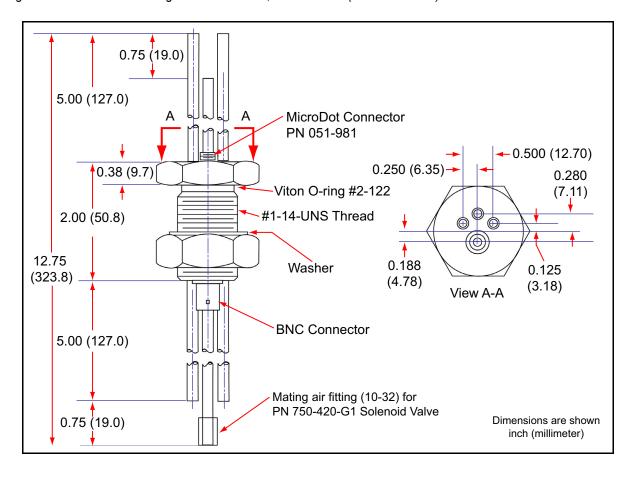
1 in. bolt feedthrough with three tubes, two electrical (PN 750-707-G1)
